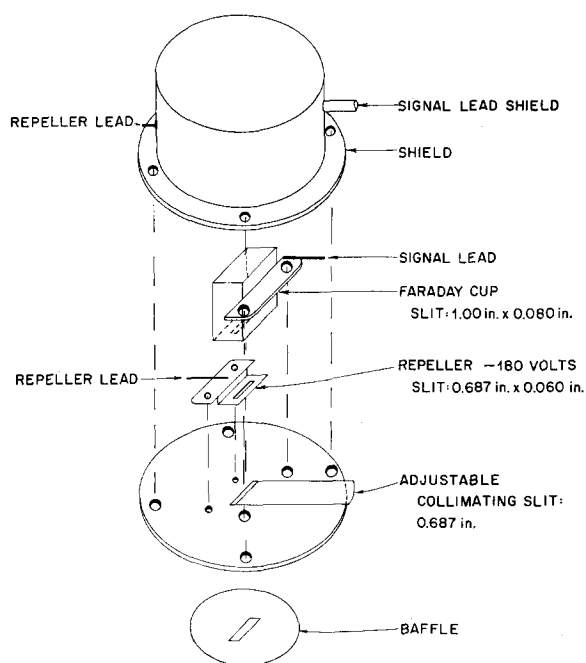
In-line collector assembly showing complete shield which is placed around the Faraday cup.
